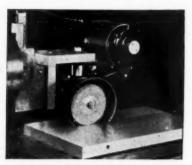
Grinding a flat surface to precision tolerances with a portable grinder mounted on head of a shaper.
